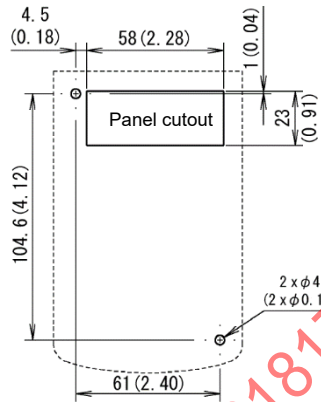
(b) Panel cutout size drawing (when reusing panel cutout for previous product)
